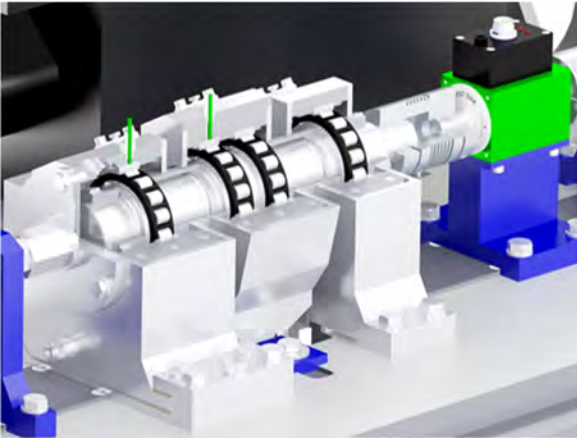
Cross section of the test bearing unit of the Bearing Friction Test Rig.
